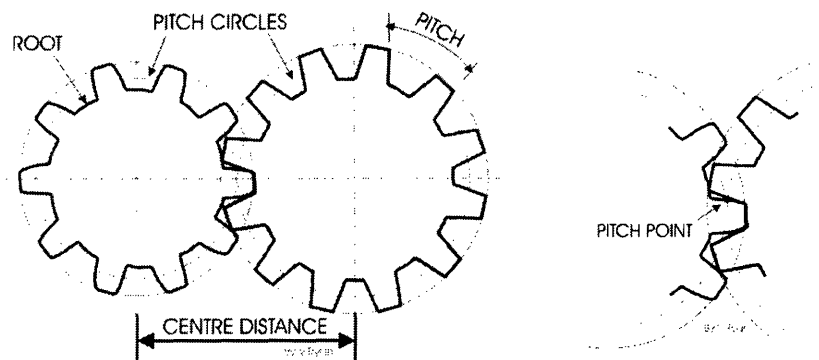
(Left) Diagram of gear components. (Right) Pitch point or mesh point. (www.technologystudent.com/gears1/grdetail.htm, accessed 8/10/05)
